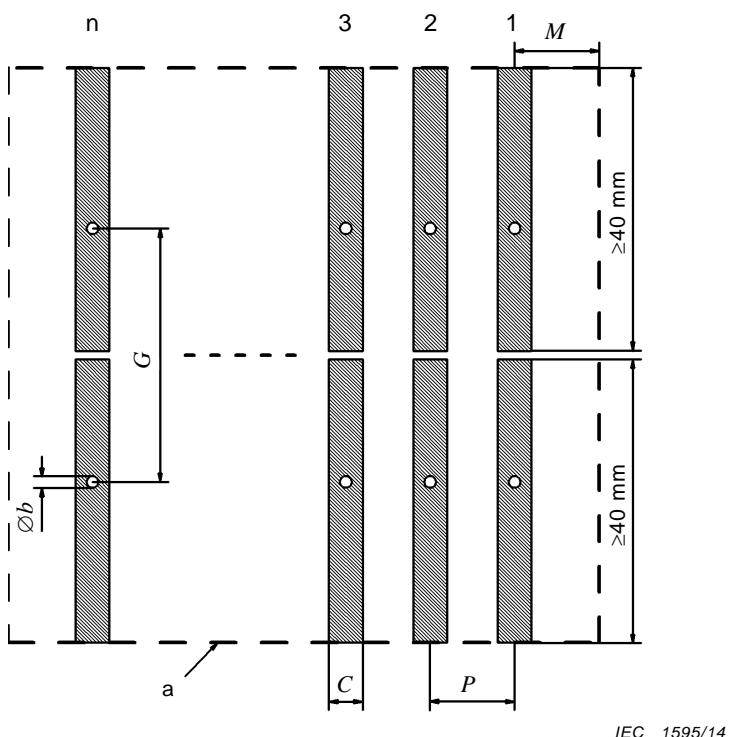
Basic layout for mechanical, environmental and electrical tests, Kelvin (4 point) connections
